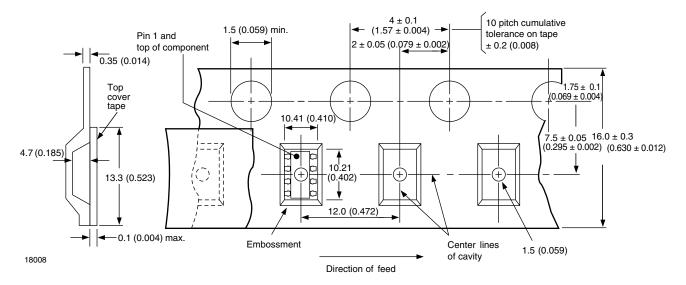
Tape and Reel Packing (1000 pieces on Reel)
